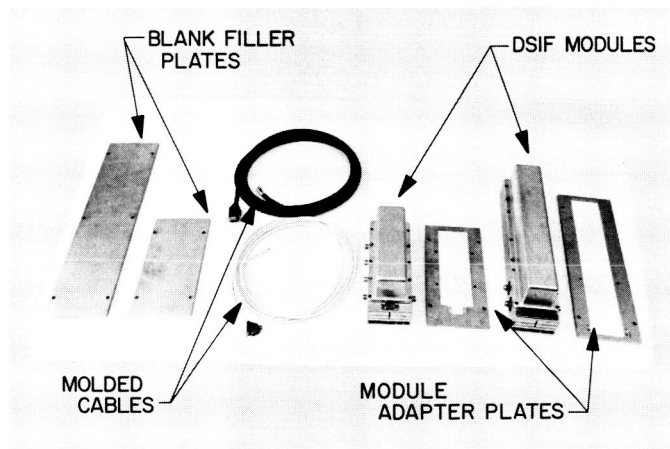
Modules, module adapter plates, blank filler plates, and molded cables
